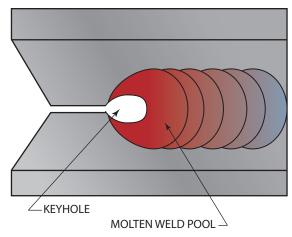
Having a key hole at the leading edge of the molten weld pool is a good indication that the joint will have 100% root penetration.
